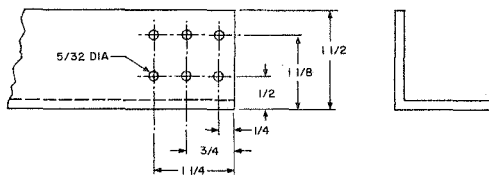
Drill guide dimensions. Make this tool from stock left over from the center support and side arms.
